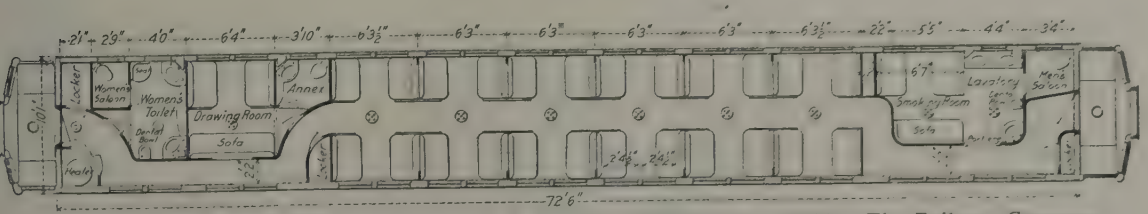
Floor Plan of Chicago, Milwaukee & St. Paul Sleeping Car. Builder, The Pullman Company.
